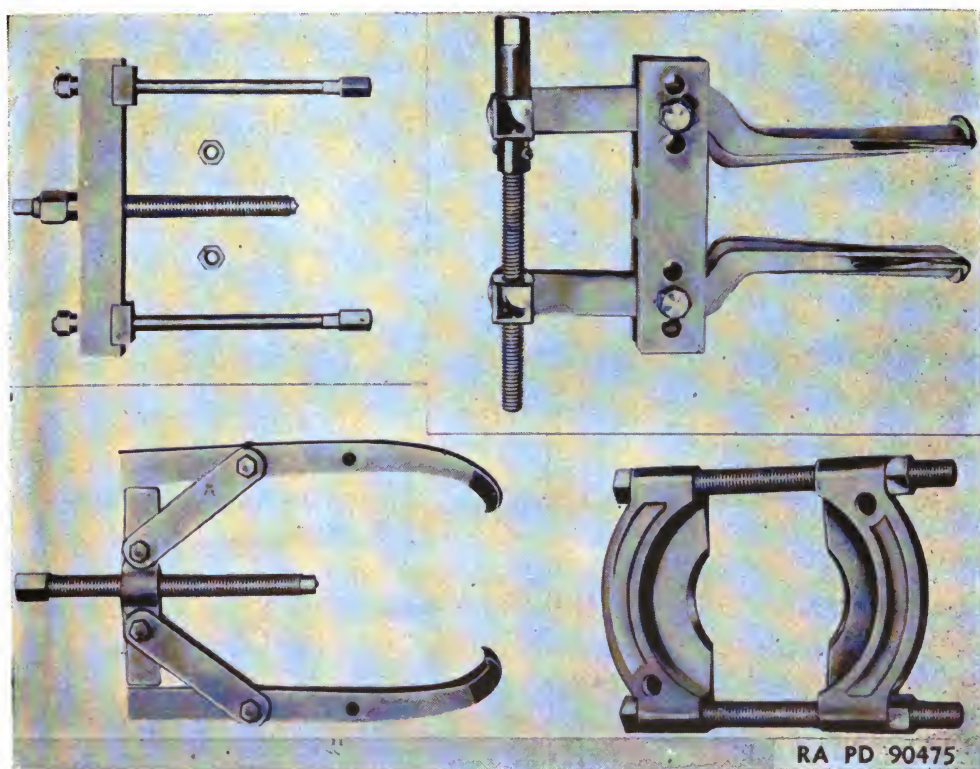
Typical bearing pullers which may be used separately or in various combinations to pull or push complete bearings or individual rings.
